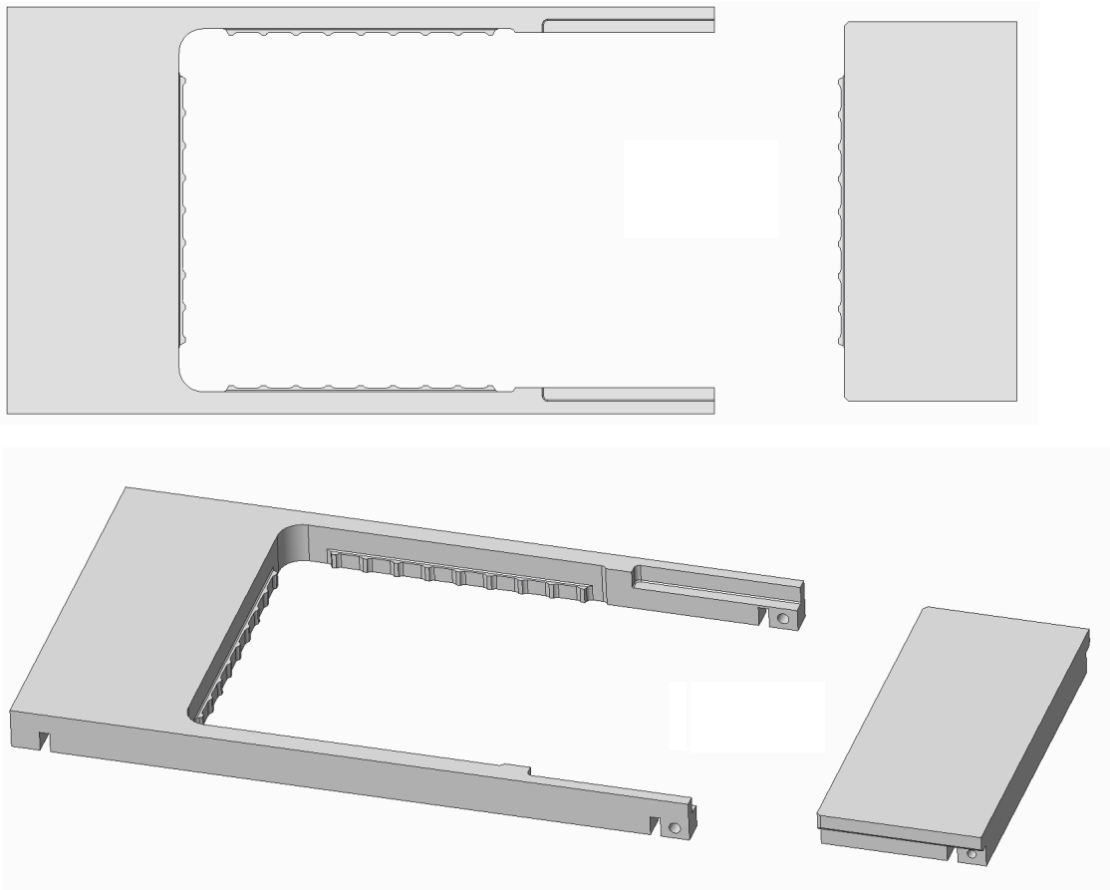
The final design with the spacer holder to the left and the end plate to the right.
